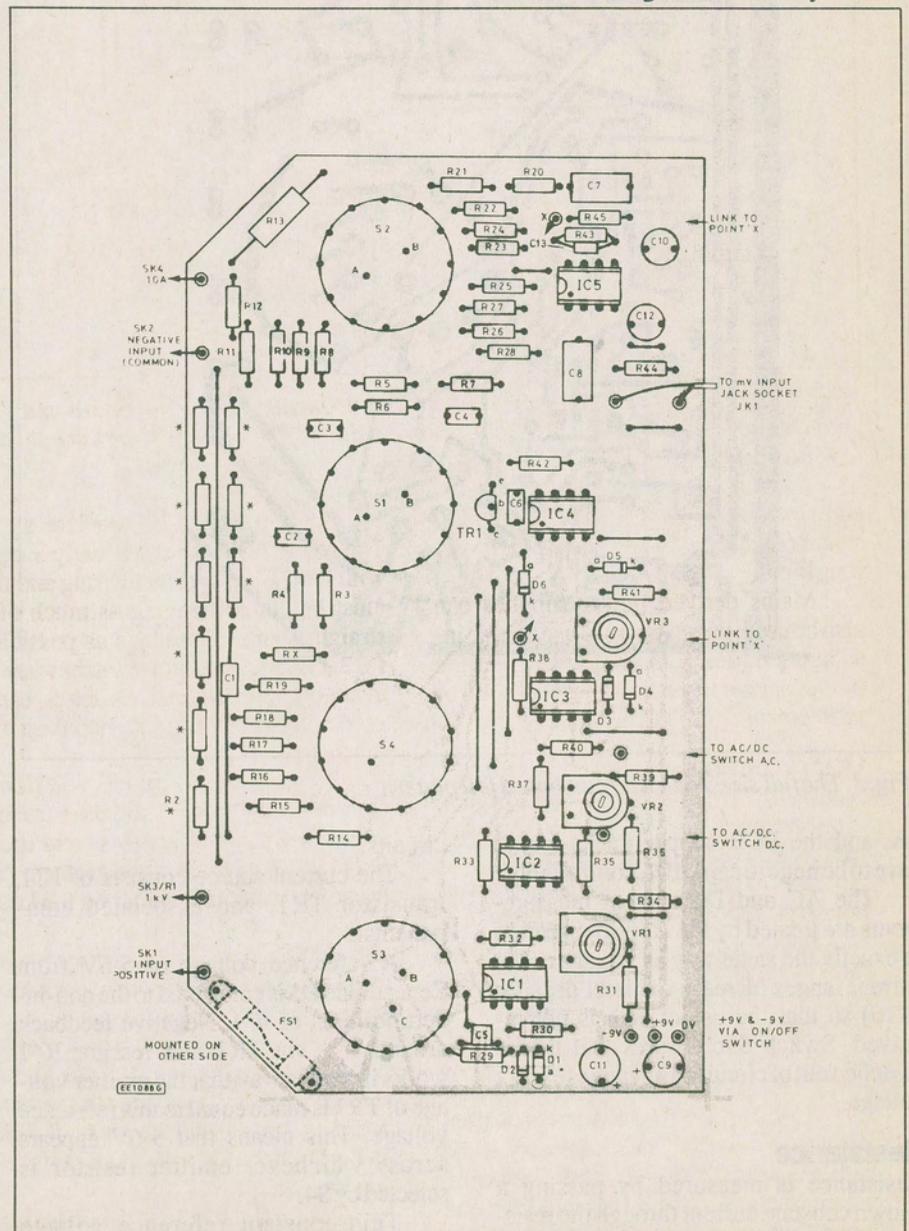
Component layout on the printed circuit board. Note that the long link wires should be made with plastic insulated connecting wire.
